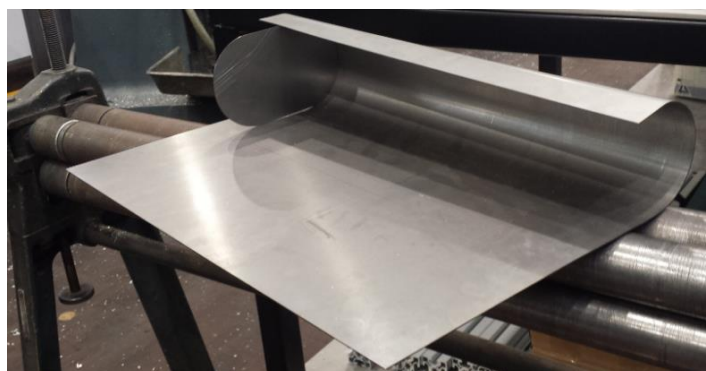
Mild steel muffler case and bulkhead resting on Monash University Mechanical Engineering Technical Services' sheet metal roller.
